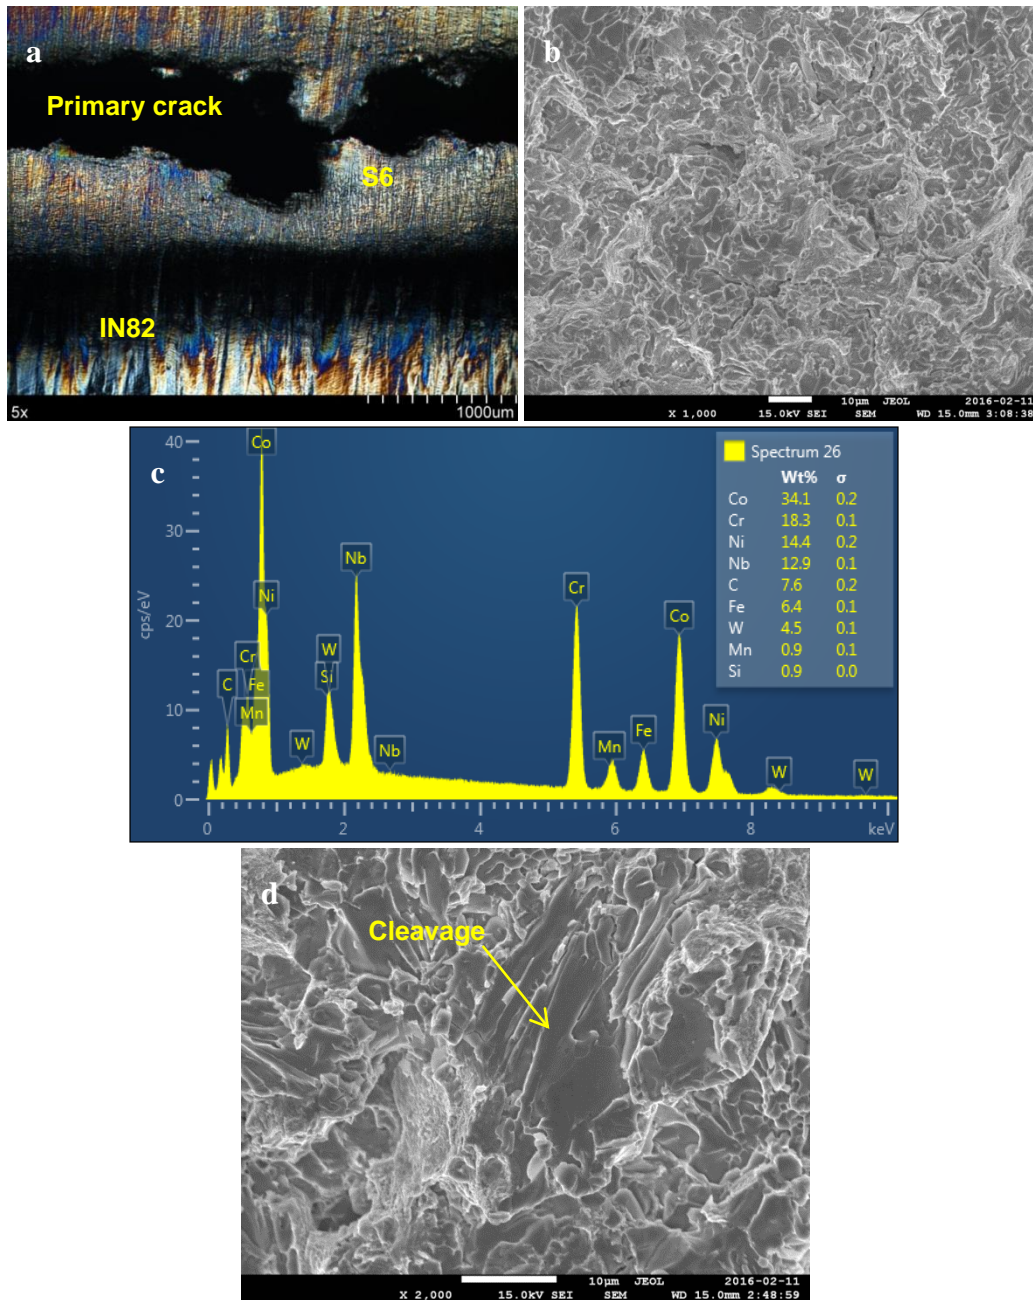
A fractured IN82 specimen in the as-tempered condition: (a) cross-section, (b) fractograph showing the interdendritic cracks, (c) EDS spot measurement on the fracture surface, and (d) cleavage areas.
